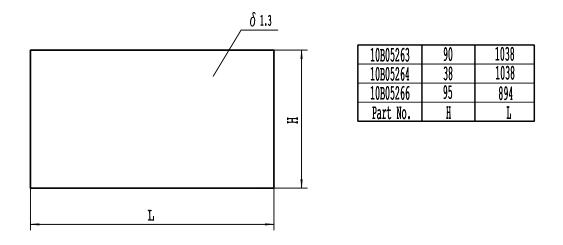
Plastic guideway plate (10B05263) (10B05264) (10B05266)
